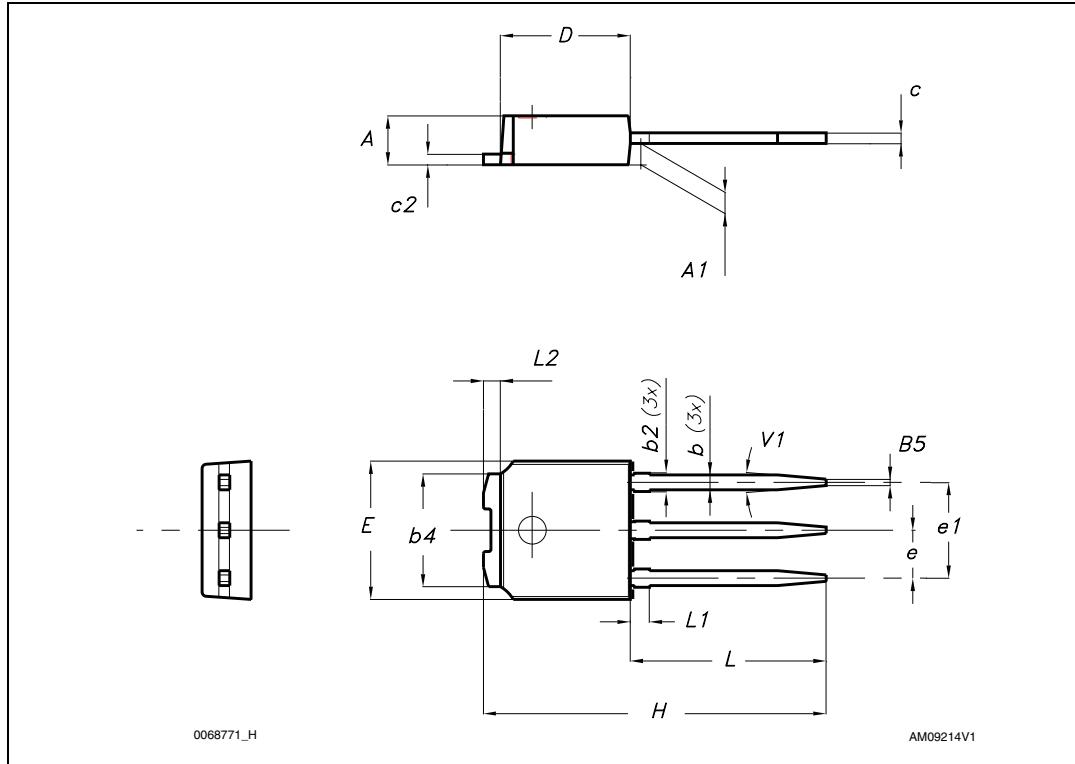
DPAK (TO-252) drawingFigure 26. DPAK footprint(a)
